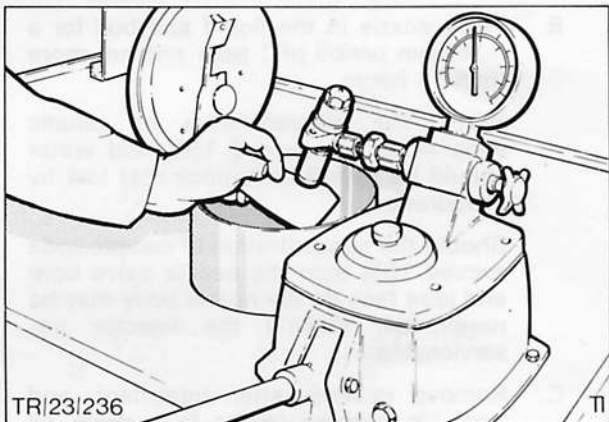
Checking injector for leakage by using a piece of absorbent paper
